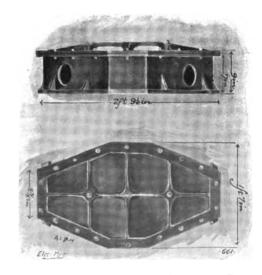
Cable Distribution Head -- Longitudinal Elevation and Plan.
